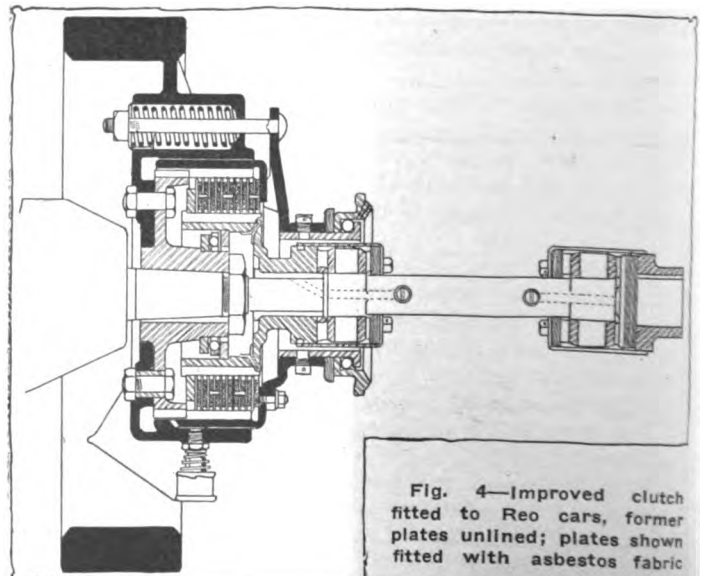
Improved clutch fitted to Reo cars, former plates unlined; plates shown fitted with asbestos fabric
